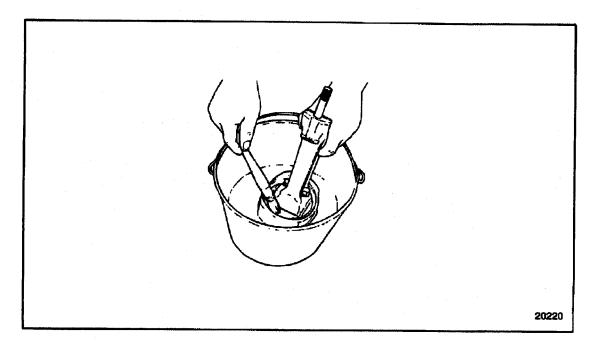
Piston and Connecting Rod Assembly Lubrication
